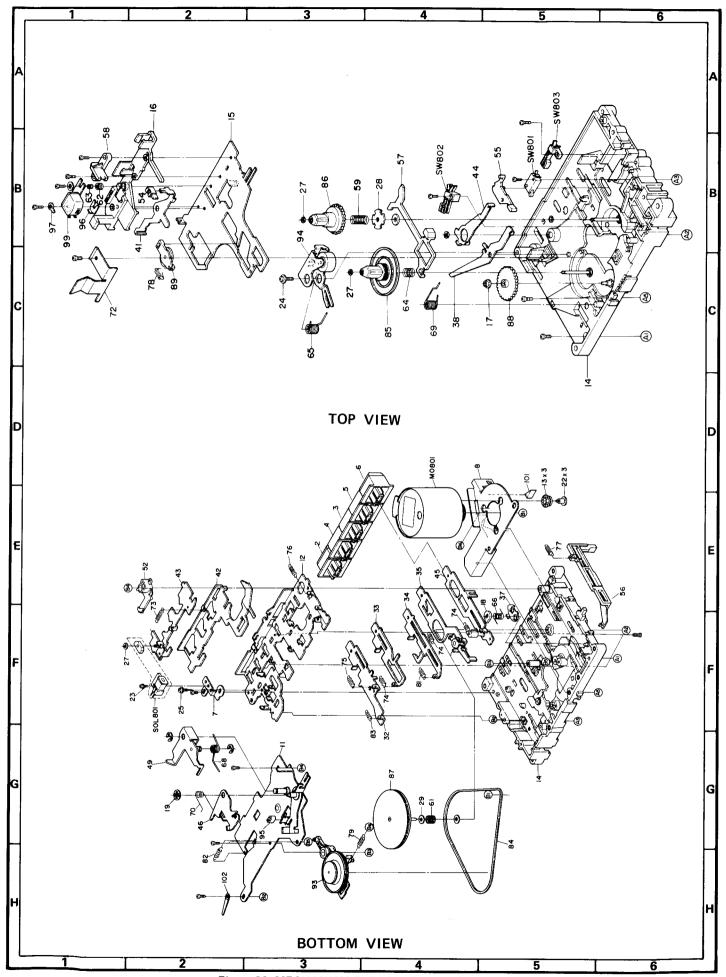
MECHANISM EXPLODED VIEW (DECK 1)
